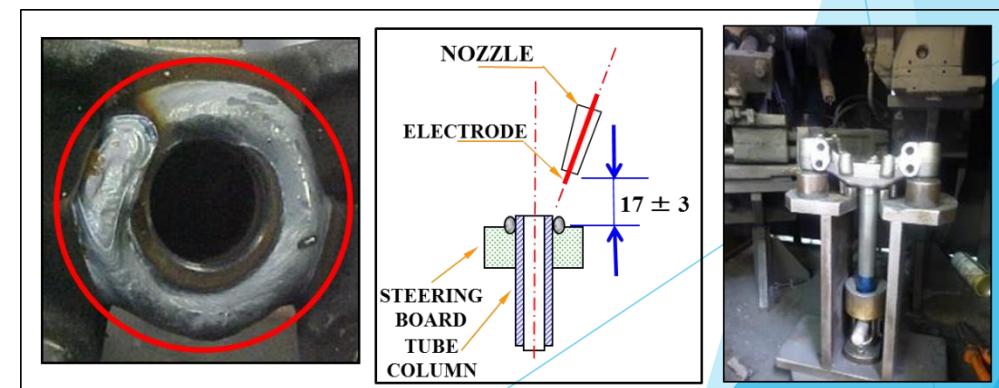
Weld bead of the displaced steering column (left), diagram of the welding process with alignment by the fork holes (center and right)
